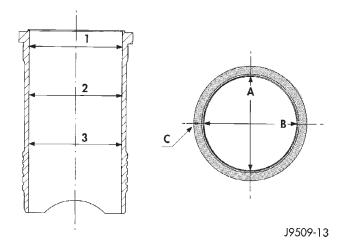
Bearing Clearance CYLINDER WALL LINER ASSEMBLY
